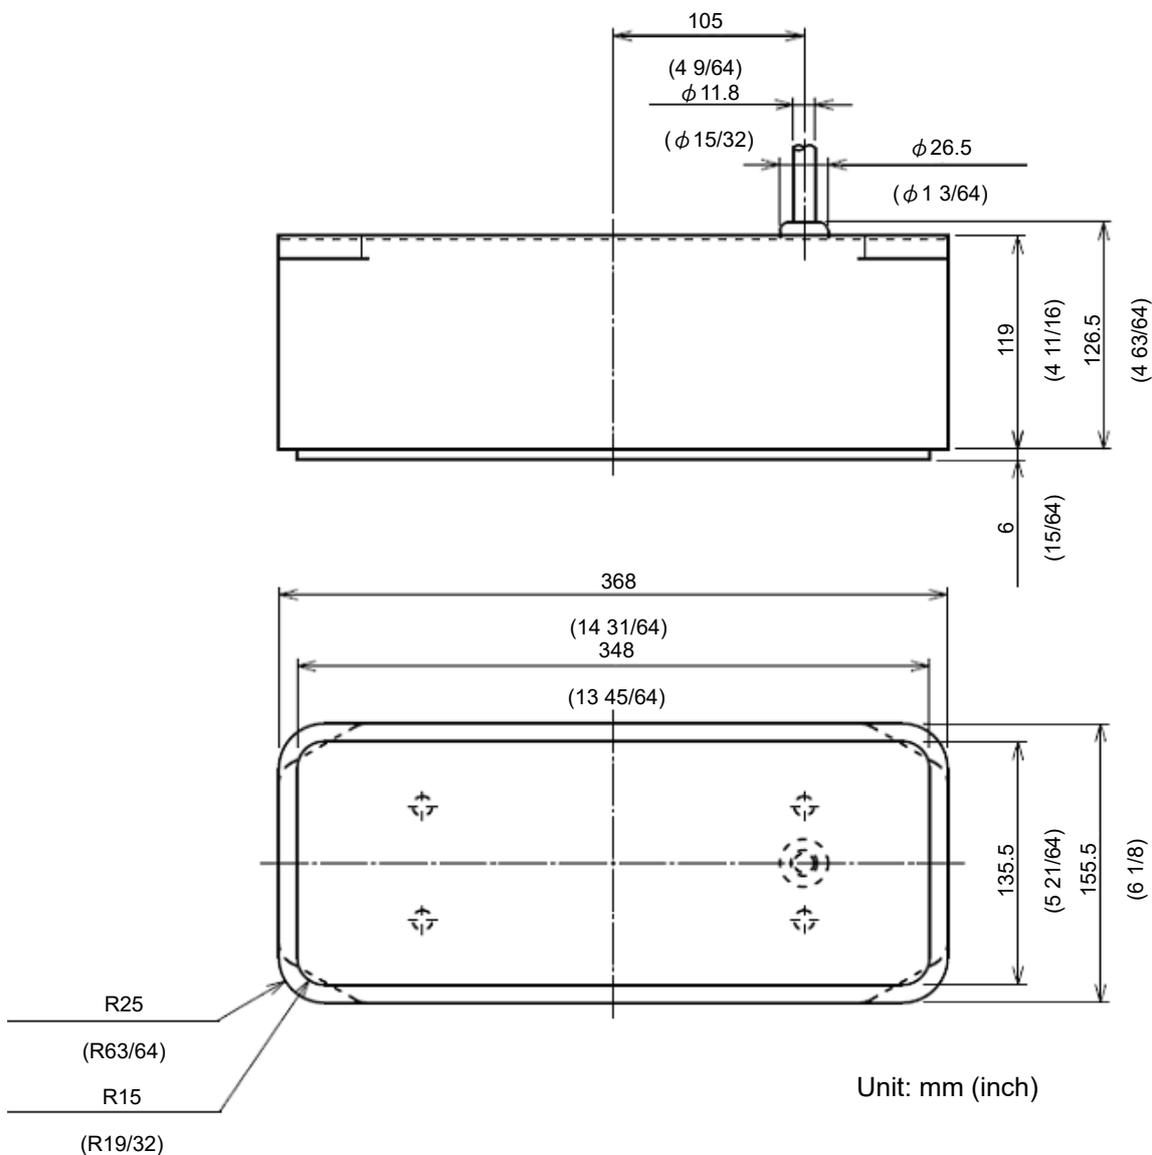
Outline dimensions of a transducer (TDM-052A/062A/083)
